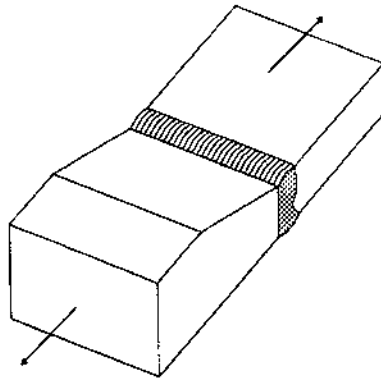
UKDEn Transverse Butt Weld 3
